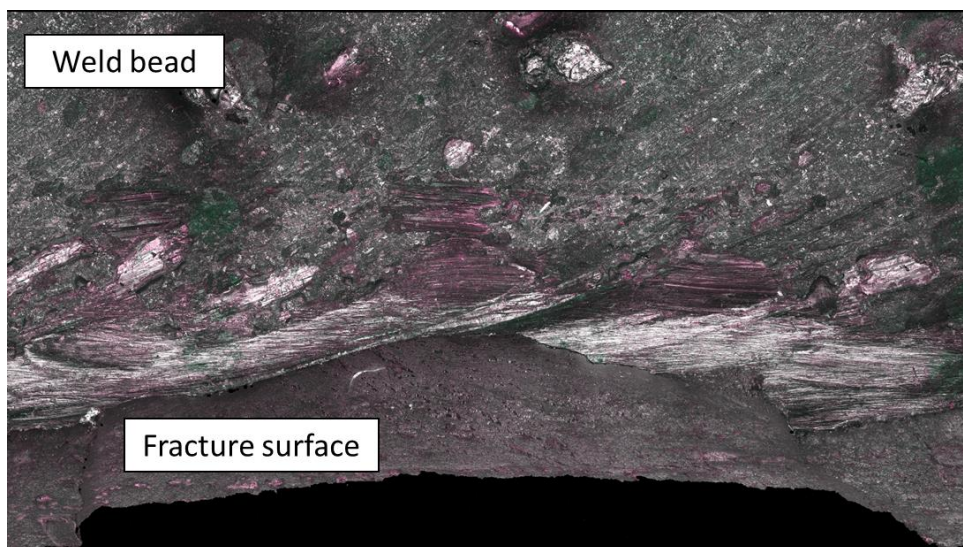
3D capture of a fractured welded joint showing both the weld bead and fracture surface at the weld toe.
